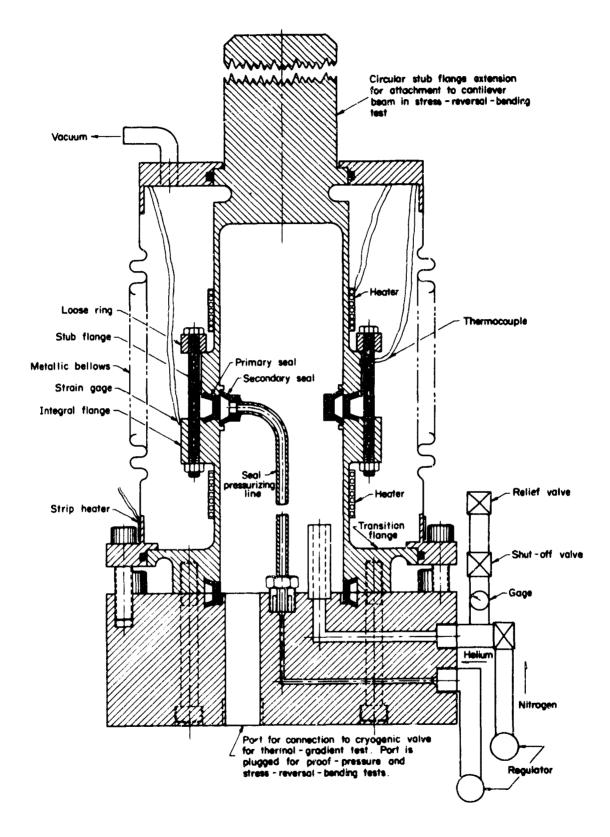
THERMAL-GRADIENT ASSEMBLY
